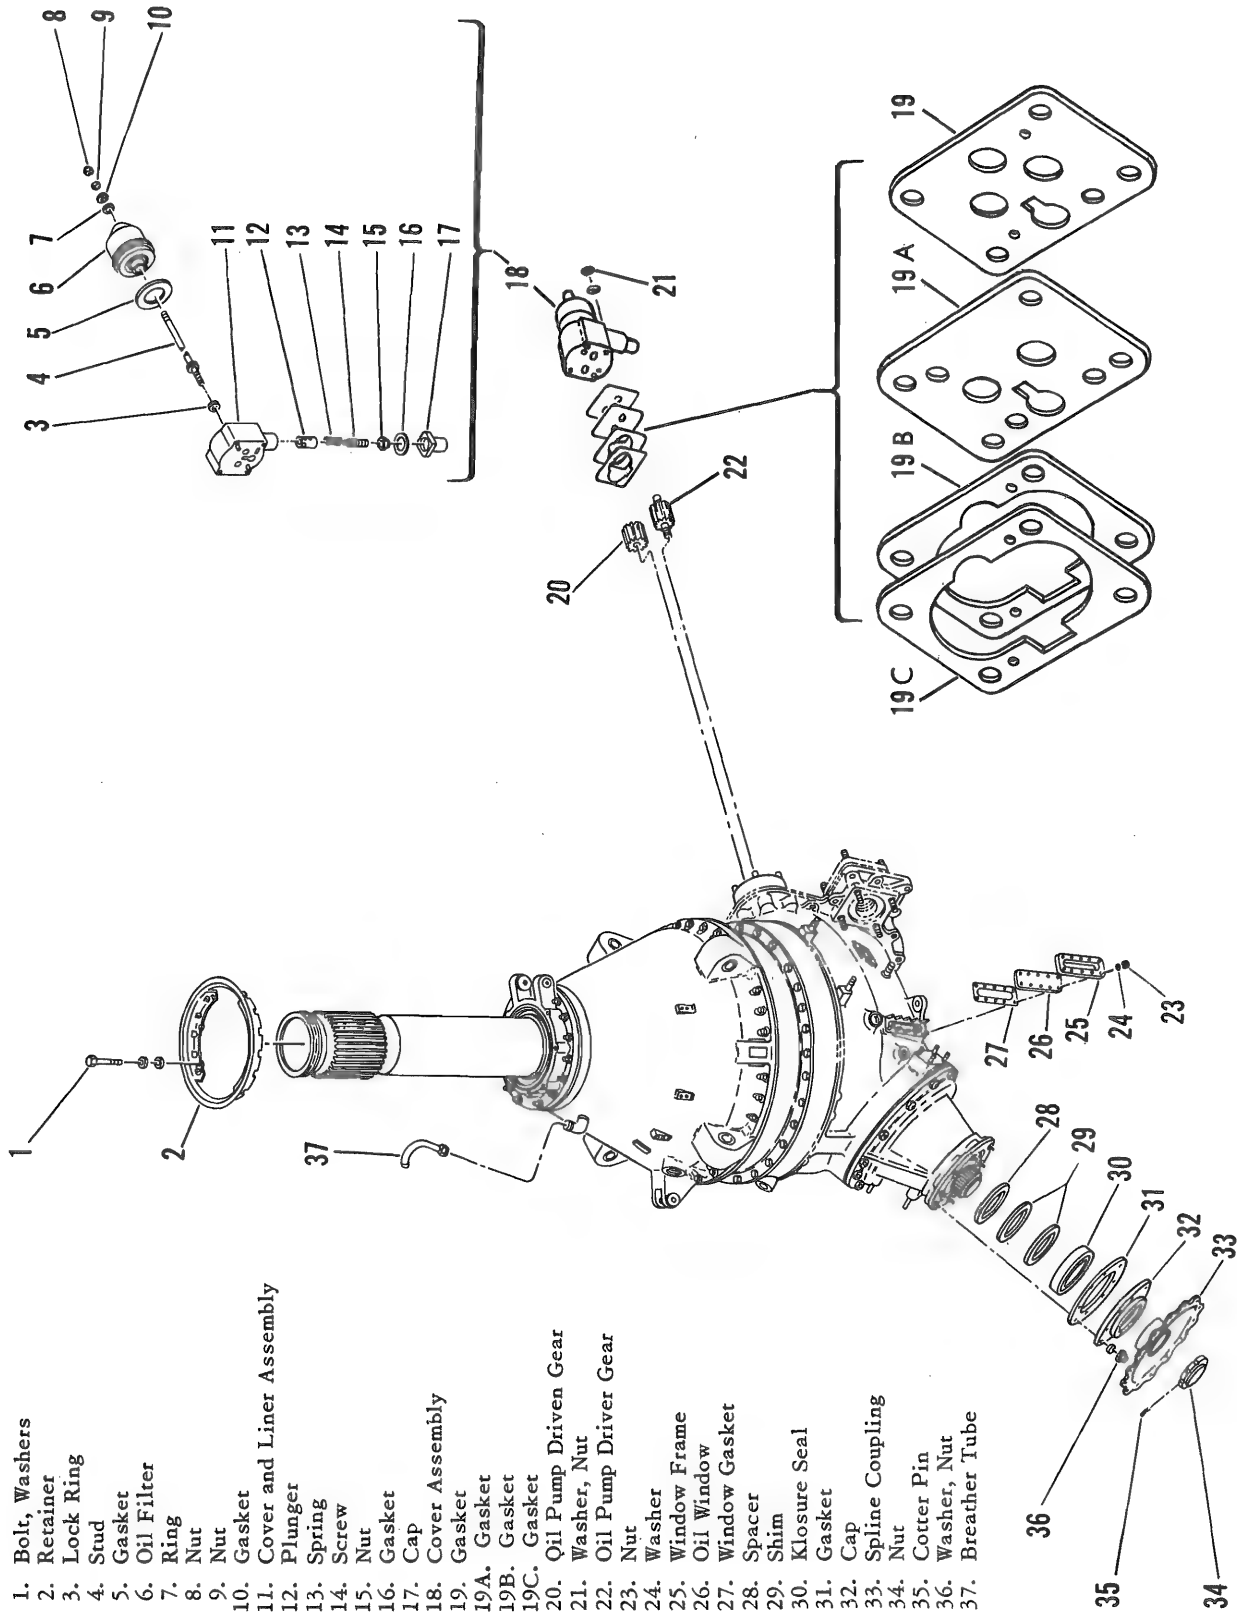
Main Gear Box Assembly - Replacement of Parts
